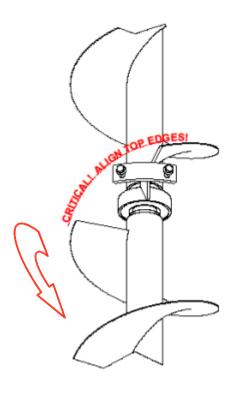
BEARING REPLACEMENT (Hanger Bearing)
